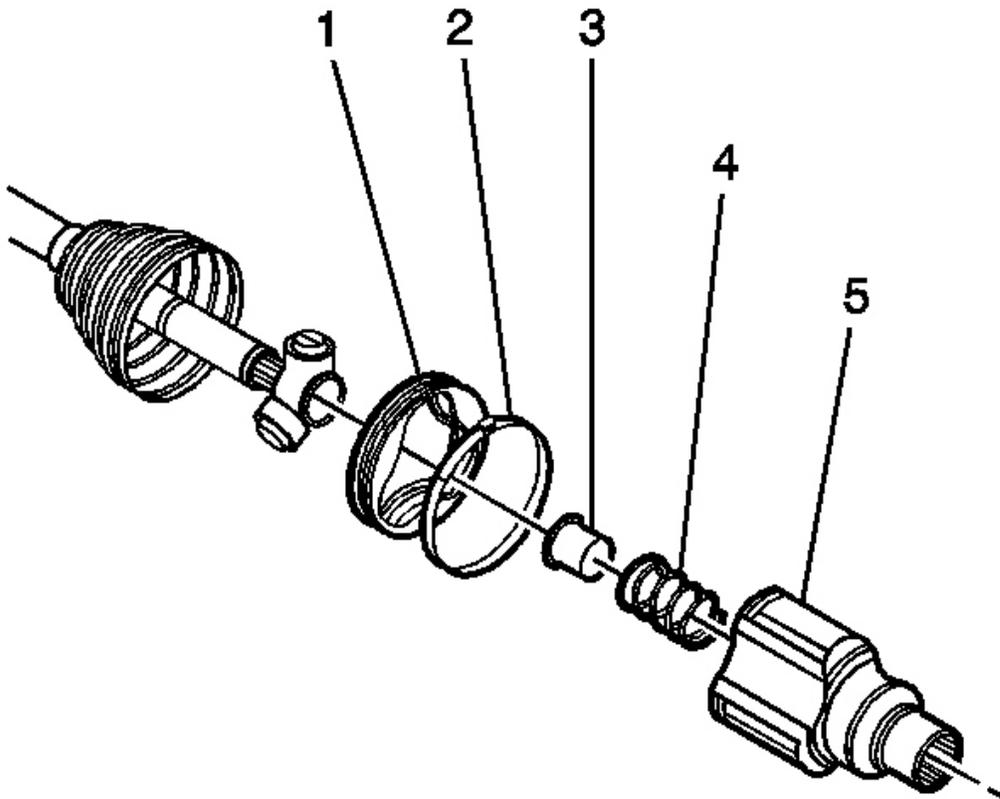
View Of Tripot Spider & Wheel Drive Shaft Bar
